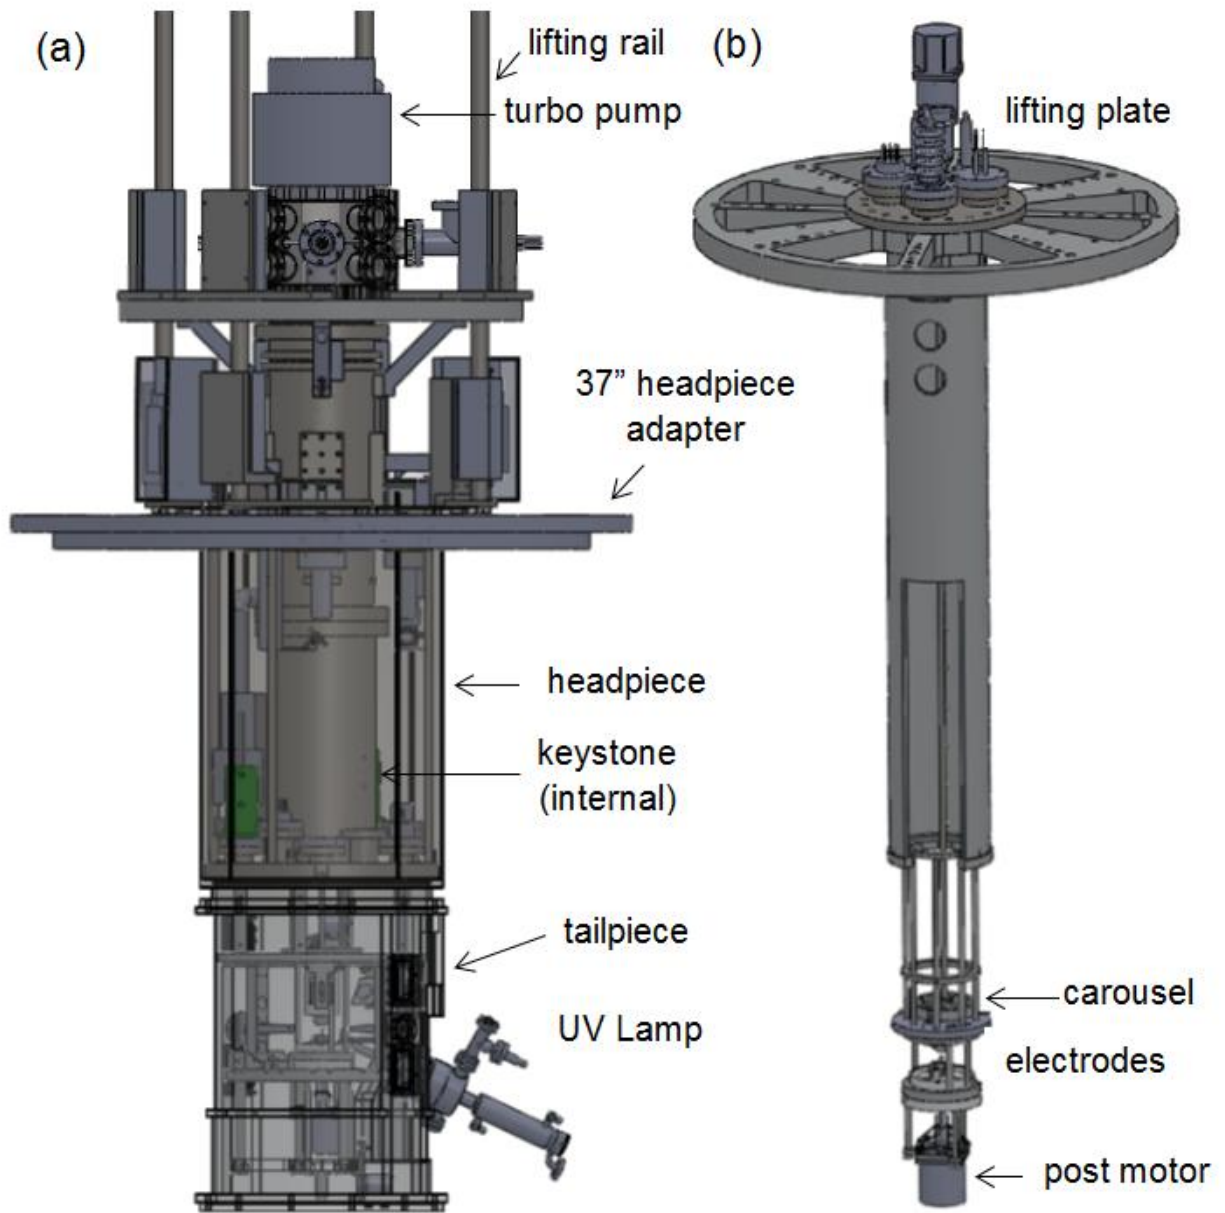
Model diagrams of (a) the full NESL in its current configuration and (b) the electrode assembly contained within the keystone, headpiece, and tailpiece assemblies (adapted from [5] with permission). Note that below the 37" headpiece adapter and external to both the headpiece and tailpiece is the detector chamber rough vacuum of the beamline. Within the tailpiece and keystone is the internal NESL vacuum, and the area within the headpiece but external to the keystone is at atmospheric pressure. All components above the 37" headpiece adapter and external to the keystone and electrode assembly are also at atmospheric pressure.
